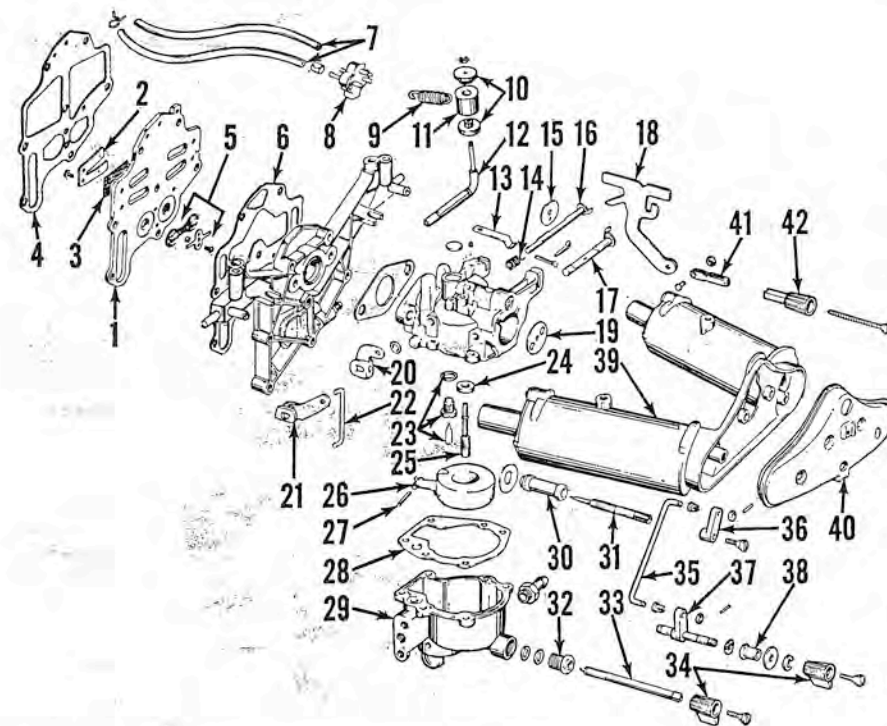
Exploded view of late model Fisherman carburetor. Early models are similar.
